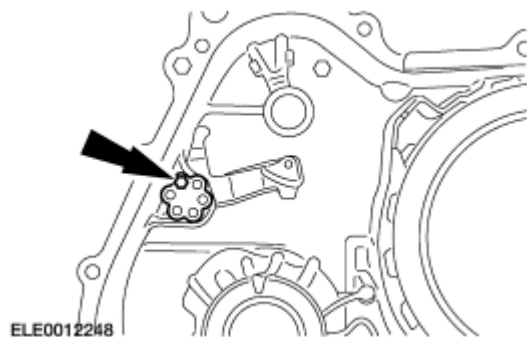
Parking Pawl Shaft Retainer & Bolt
